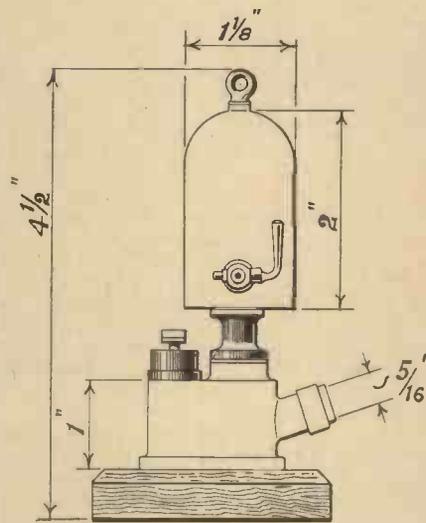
A detailed sketch showing the construction of a small hydraulic ram.
